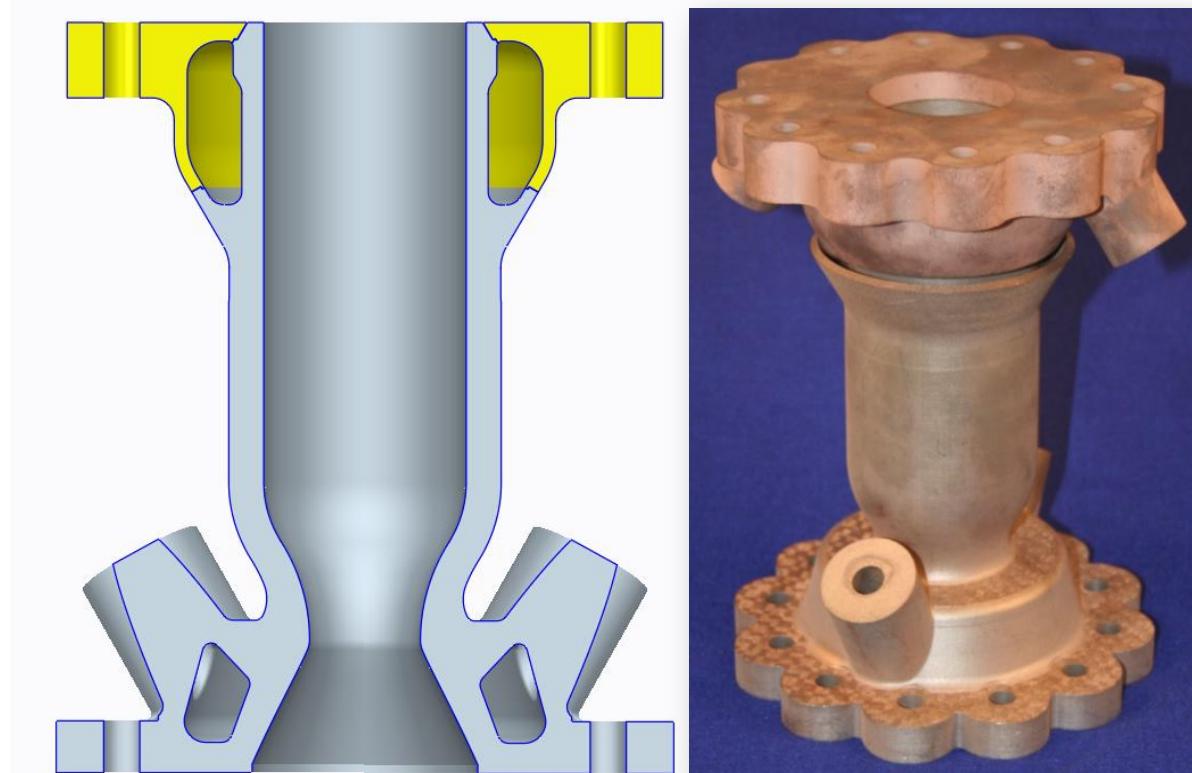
Two-piece regen-cooled AM chamber design and fabrication. Fabricated chamber on the right is shown prior to manifold machining and welding. AM GRCop-84 chamber printed at ASTS.
